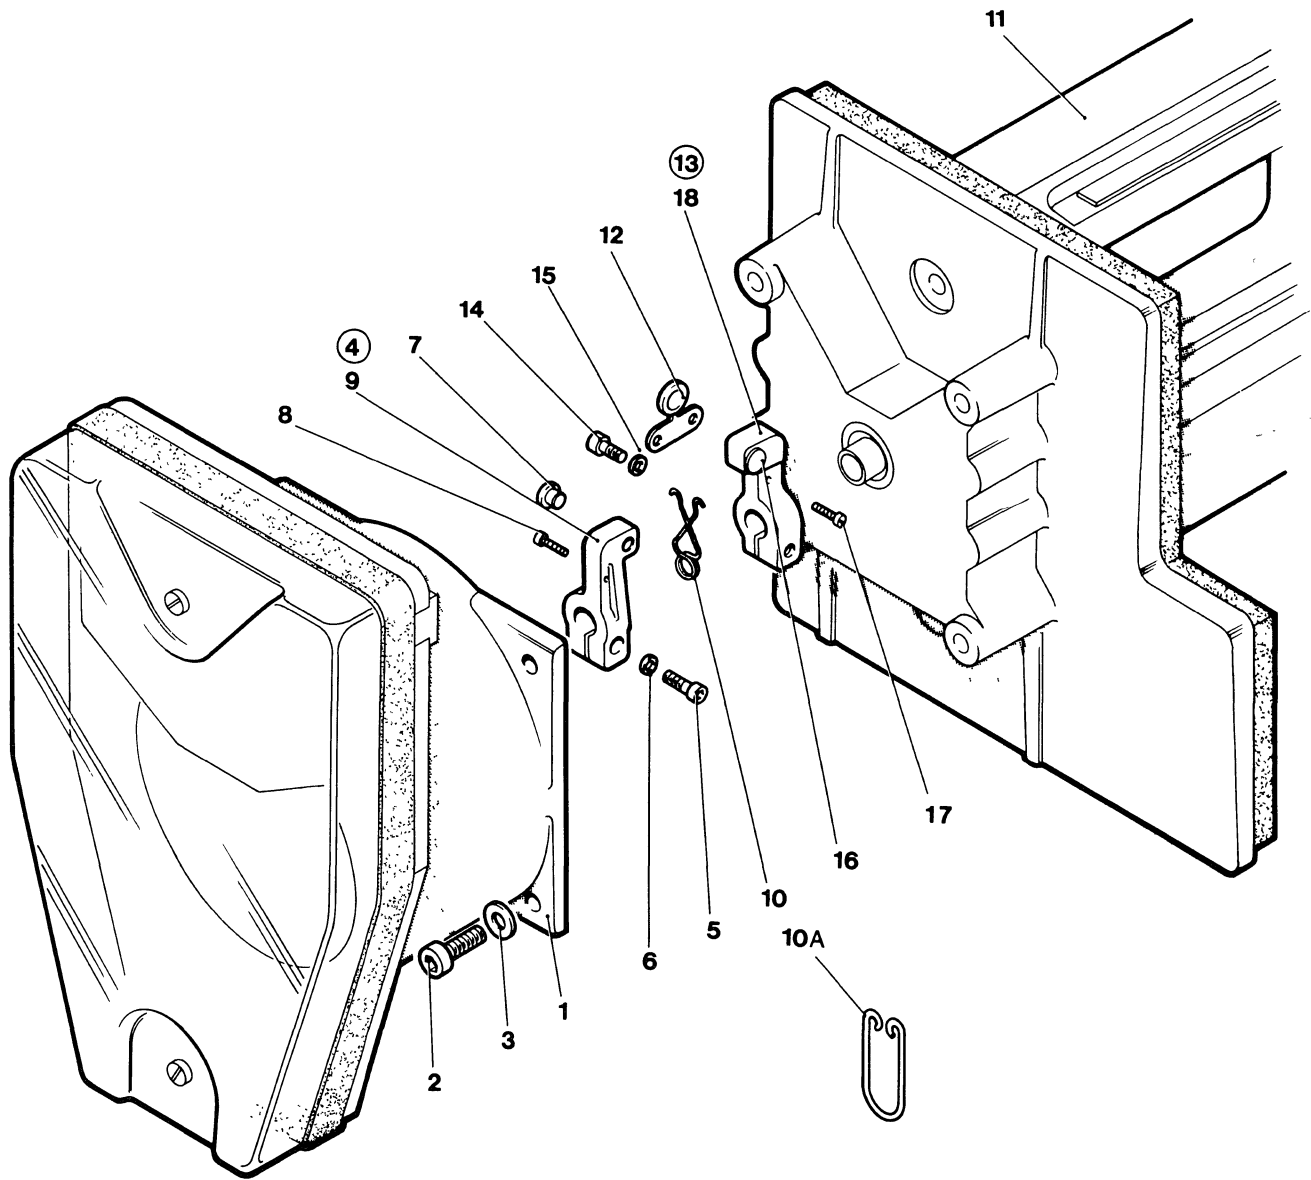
ACTUATOR ASSEMBLY (PART 1 OF 4)
